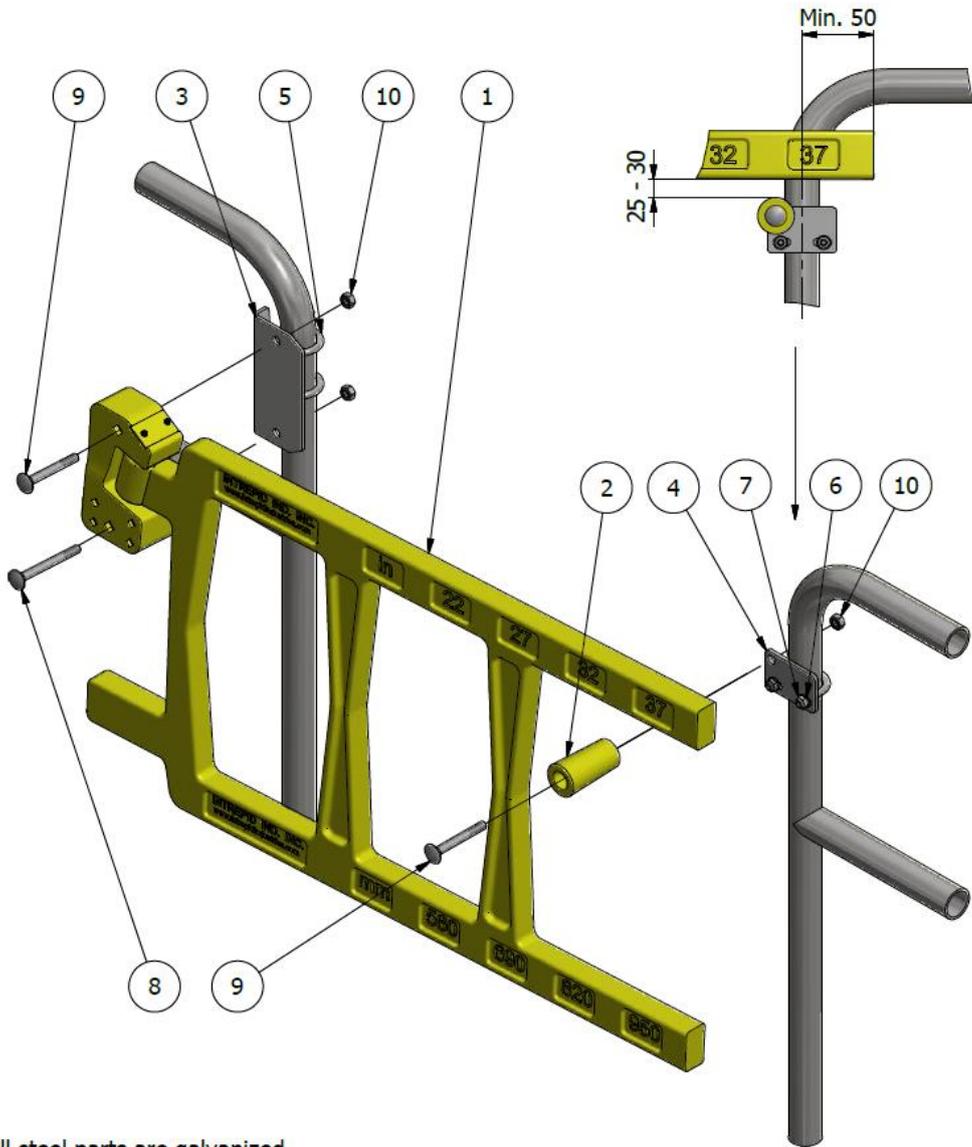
and 6, drawings for adapter of mounting bracket for pipes
